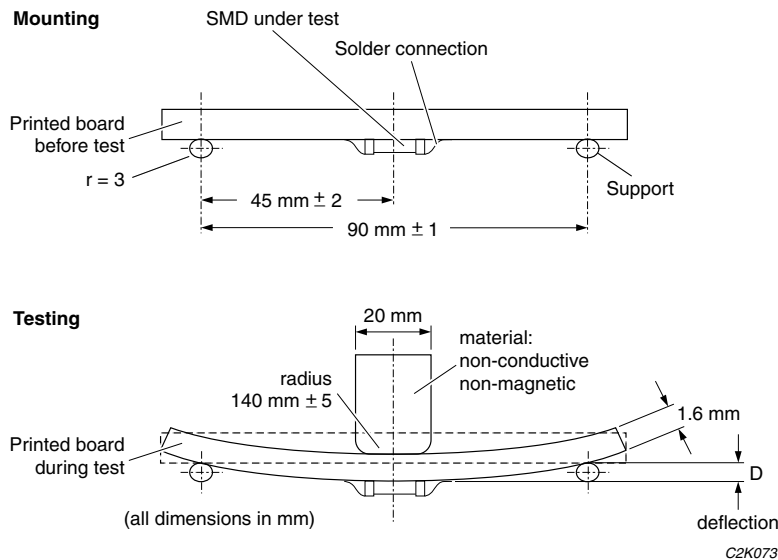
Principle of bending test according to IEC 50 (CO) 214 (with MLCC soldered on test board)
